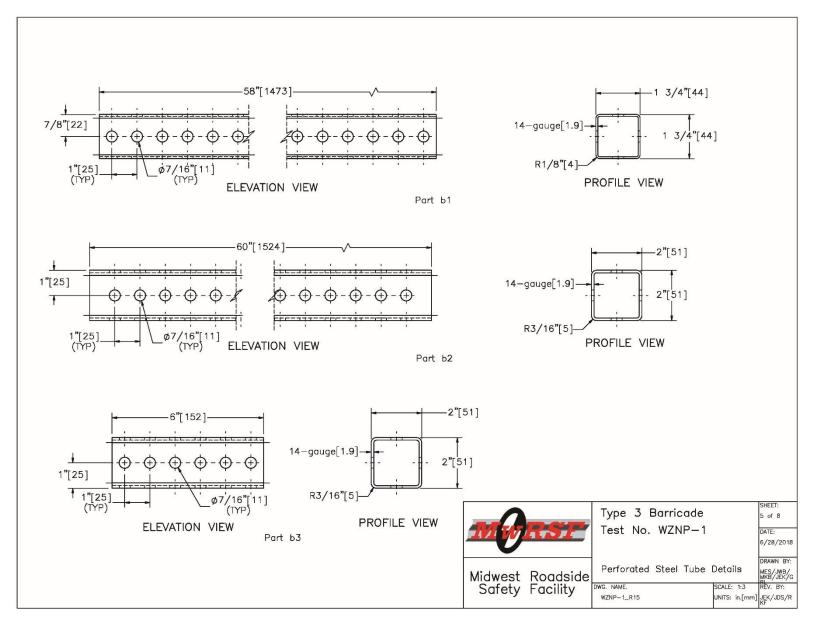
Perforated Steel Tube Details, Test No. WZNP-1
